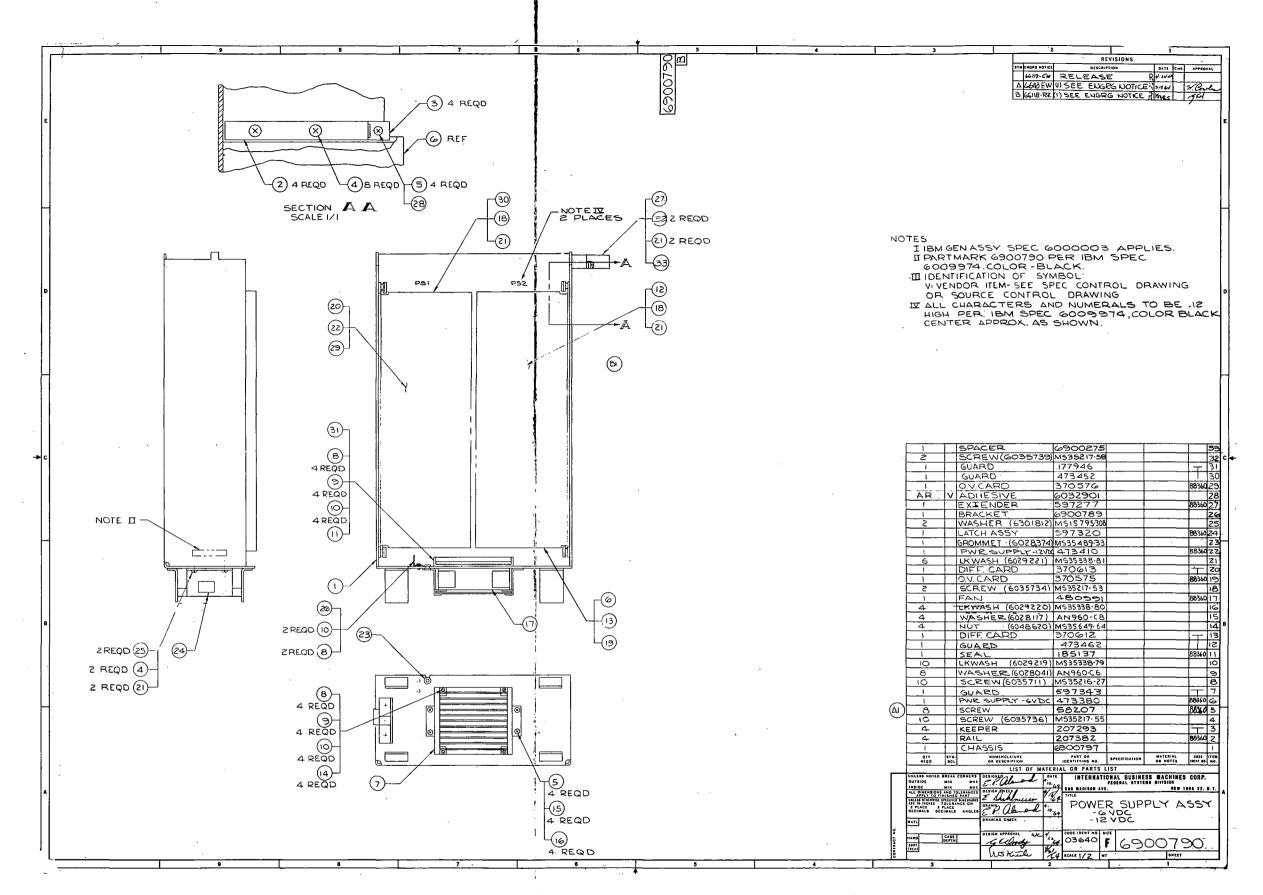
Power Supply Assembly (01B7) Assembly Drawing
